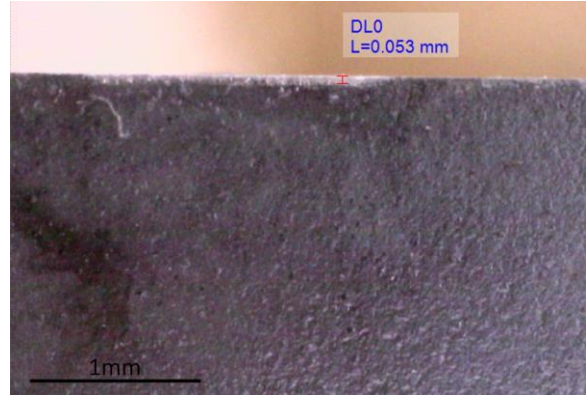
46.4x image of the insert 1 flank face after the first test cut; 53 μm of flank wear width was measured using the digital microscope.
